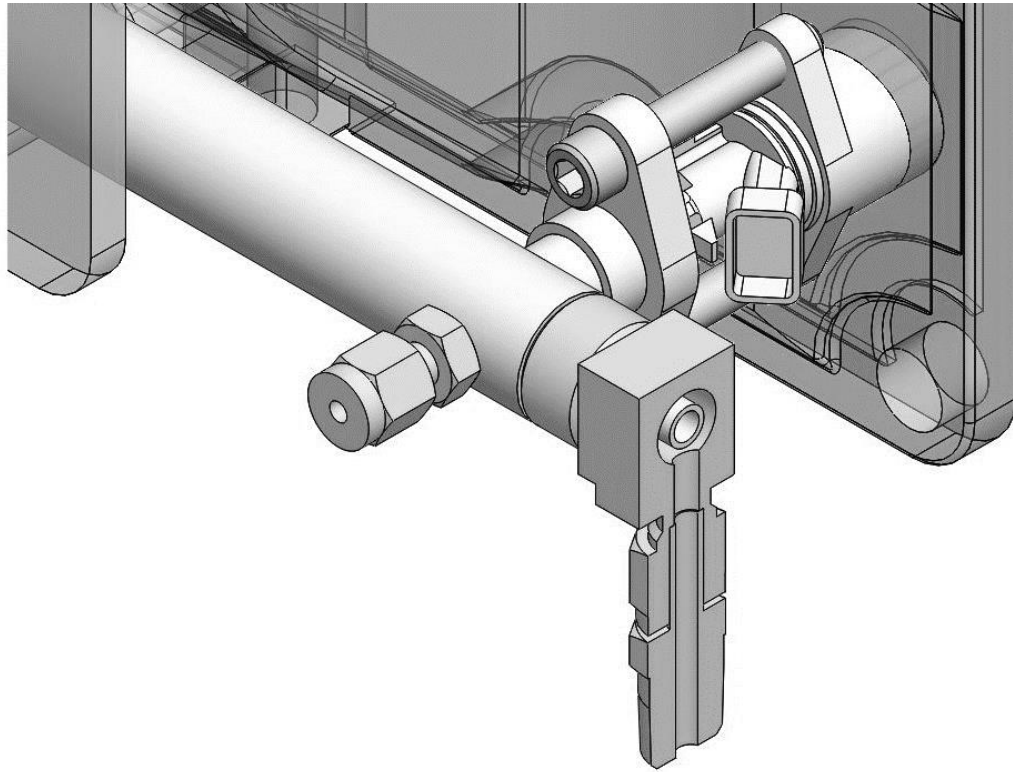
T-fitting section view of preliminarily designed, circular shell, heated fuel rail
